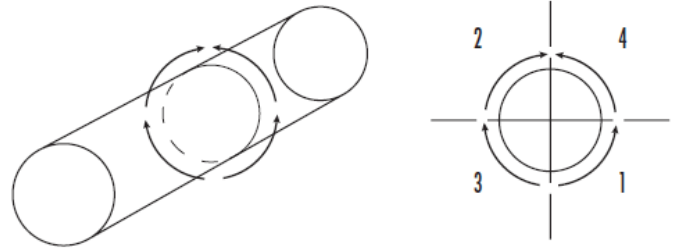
BALANCED WELD JOINT SEGEMENTS
